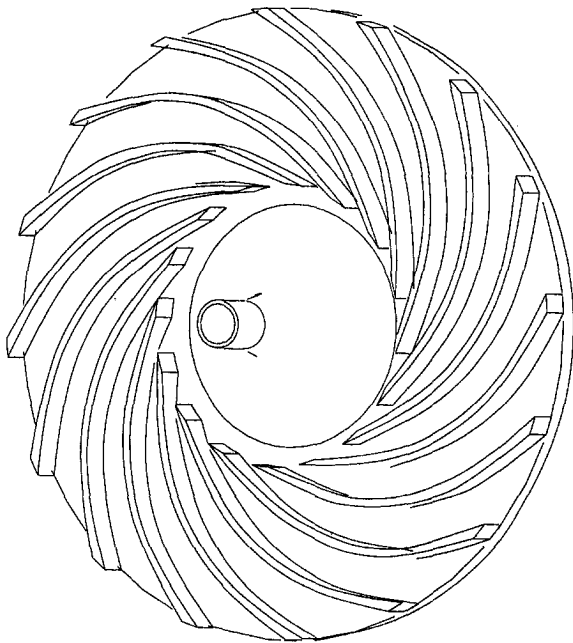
Line drawing of 16-blade test impeller (shroud removed)
